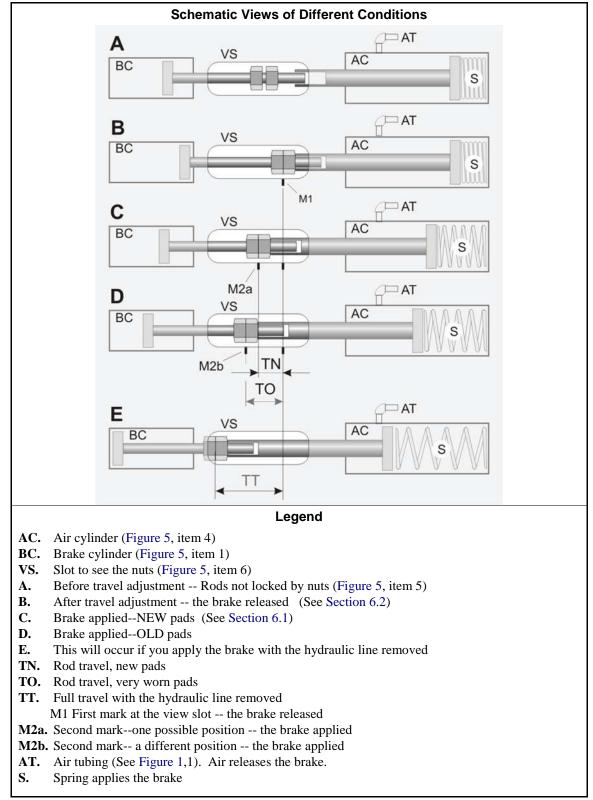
The Adjustment between the Brake Rod and the Air Cylinder
